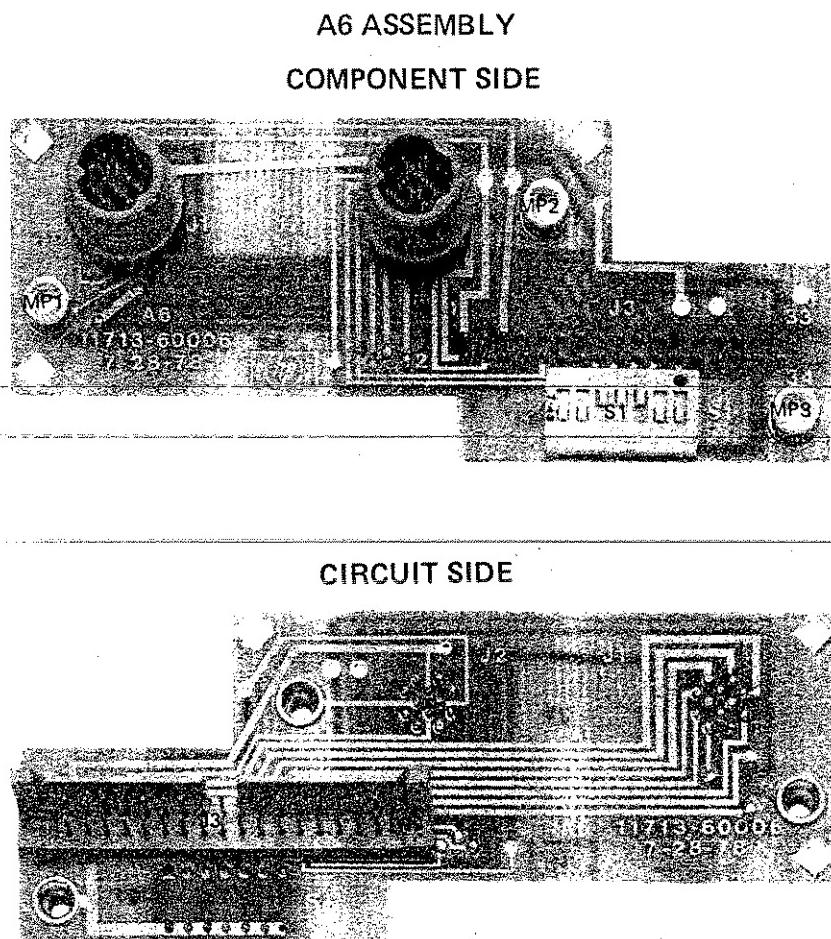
A6 Interface Assembly Component Locations (P/O CHANGE B)
